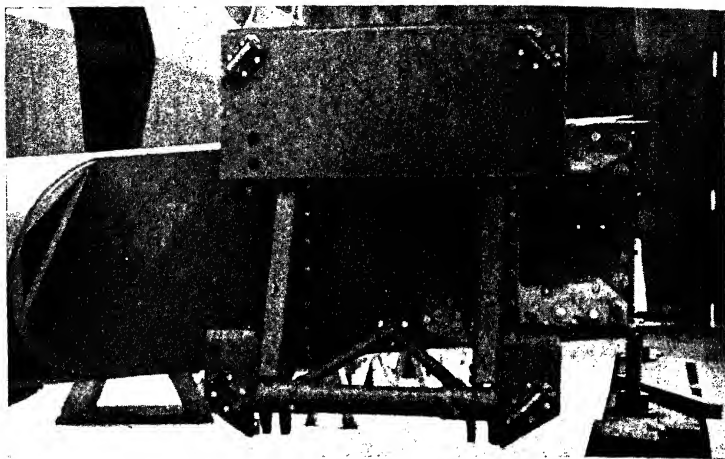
SHOWING FORK FITTINGS FOR ENGINE MOUNTING.
